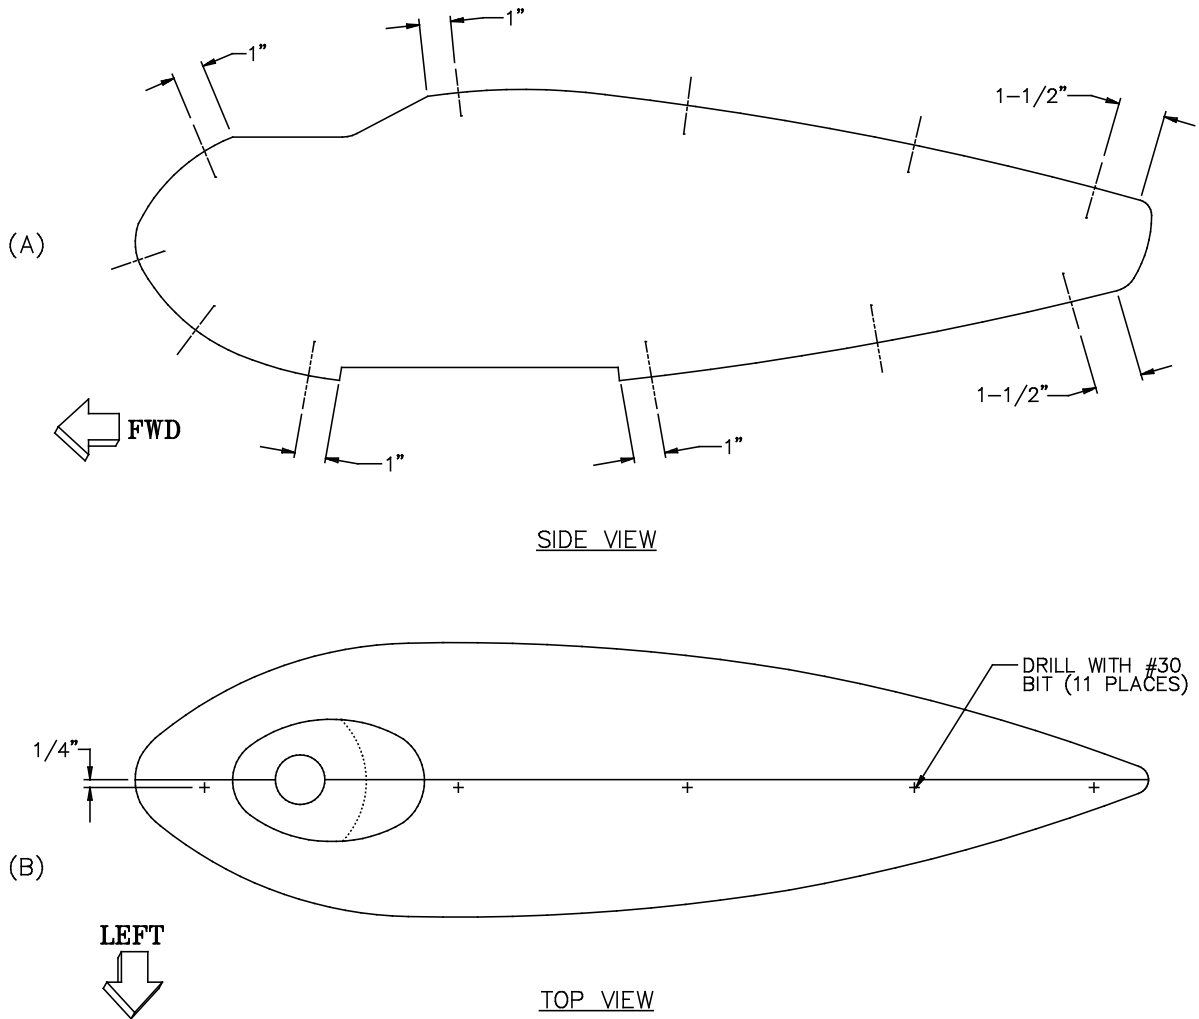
Drilling the Screw Holes in the Nose Wheel Pant
